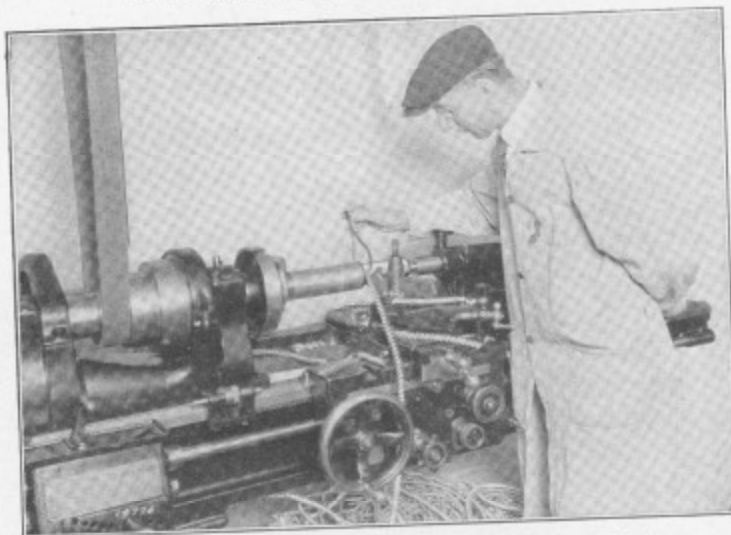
Turning a Shaft in a 16-inch Quick Change Gear Lathe
